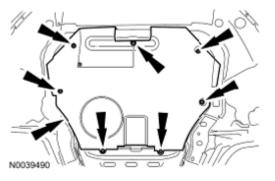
Locating Underbody Cover Screws Courtesy of FORD MOTOR CO.
